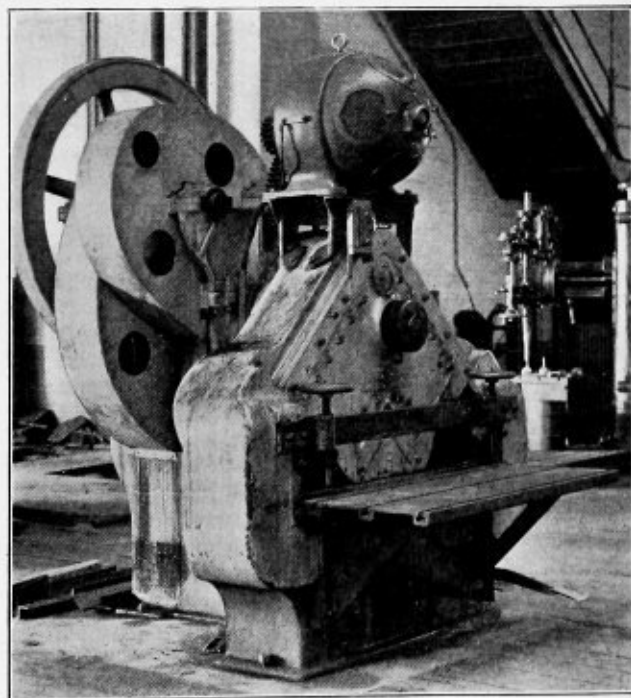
MOTOR-DRIVEN BAR CUTTER.
